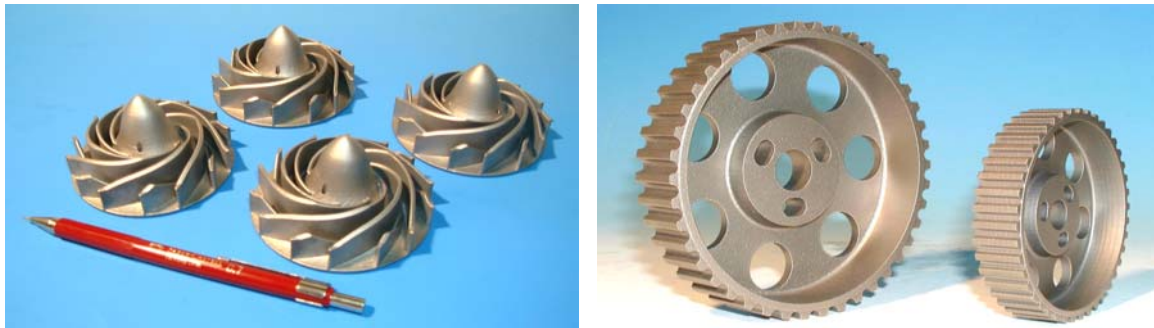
EOS direct metal laser sintered H20 tool steel parts: (left) complex helical shaped part; (right) straight-toothed gear.
